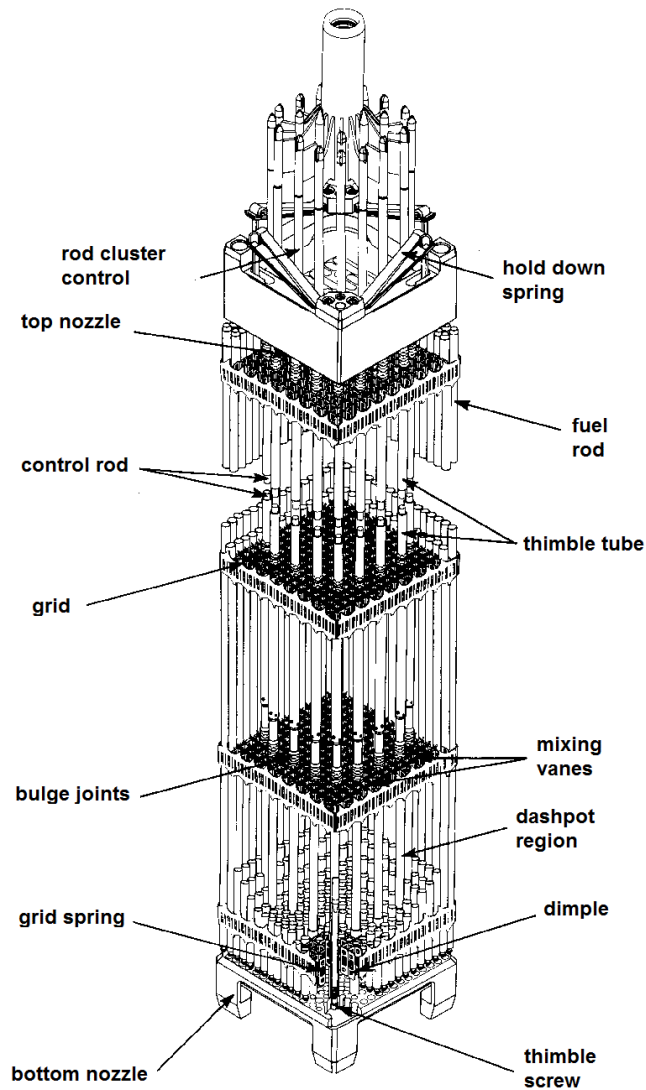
Exemplary Westinghouse 17x17 PWR fuel assembly adapted from (Anon., 2013)
